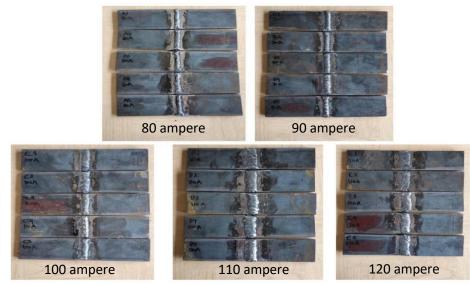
Visual observations of SMAW welding with currents of 80, 90, 100, 110, 120 Ampere
